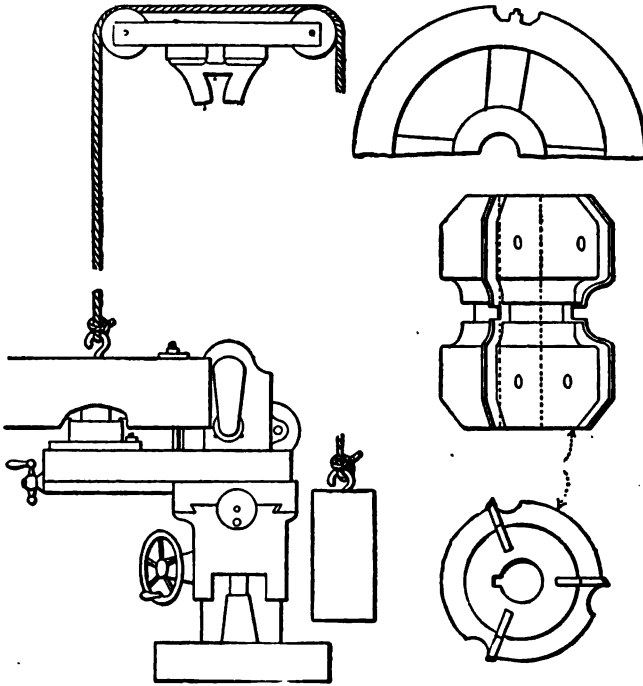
DOING A LARGE JOB ON A SMALL MILLING MACHINE
